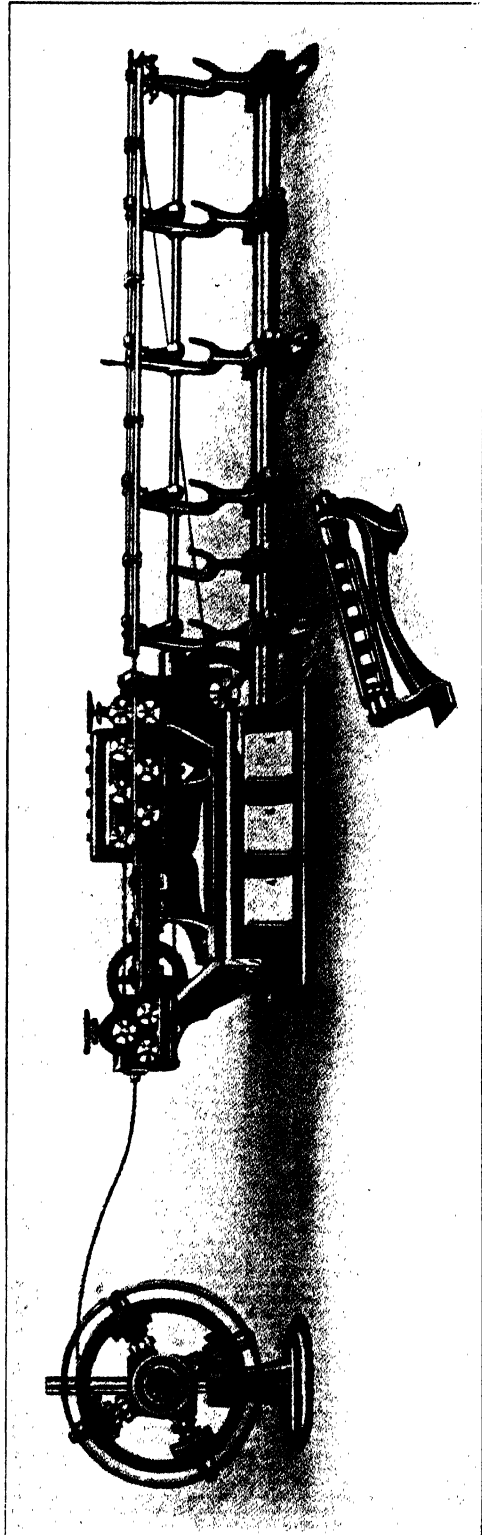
ROLL-FEED STRAIGHTENING AND CUTTING-OFF MACHINE—A. ROBINSON.
